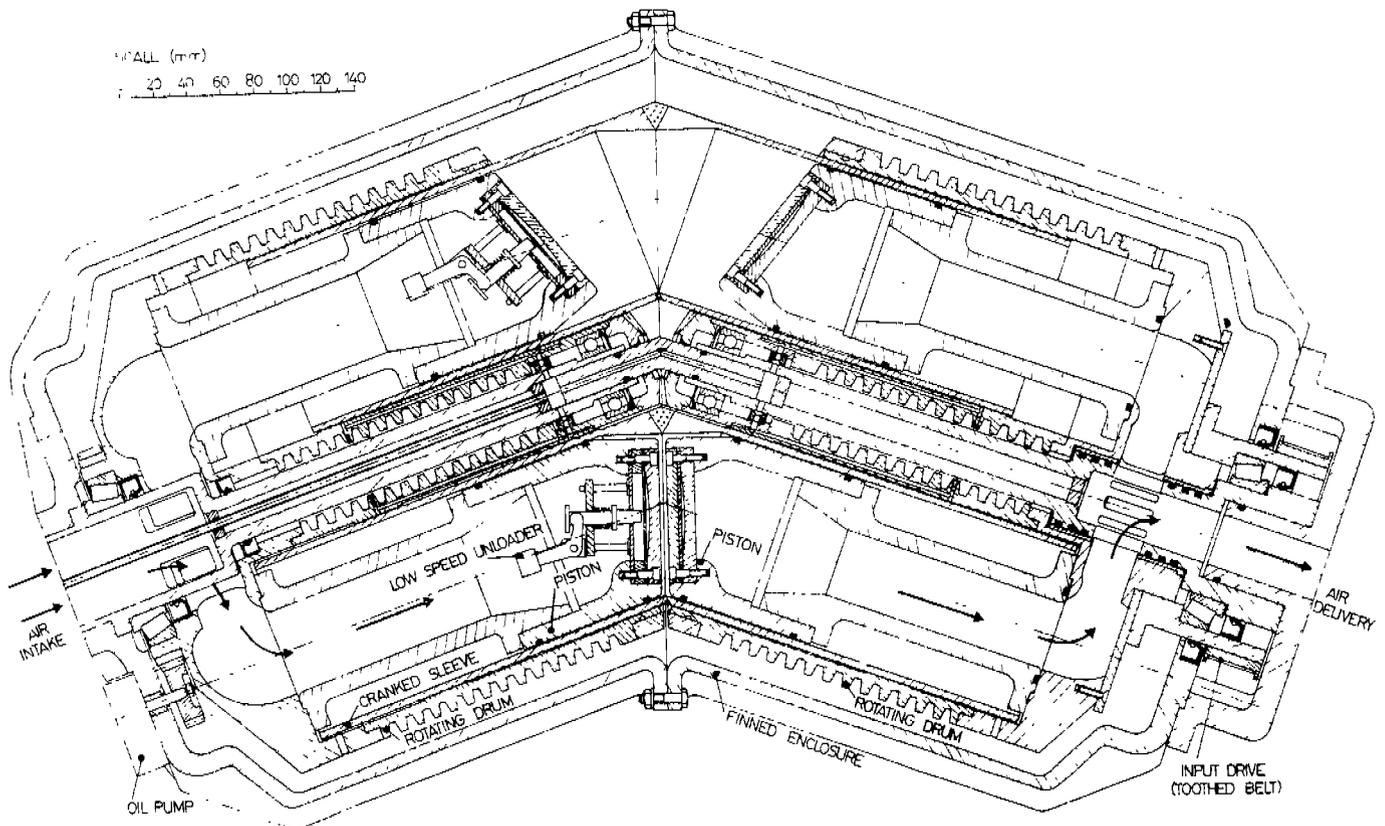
Shaw Type Rotary Compressor - 40° sleeve angle
